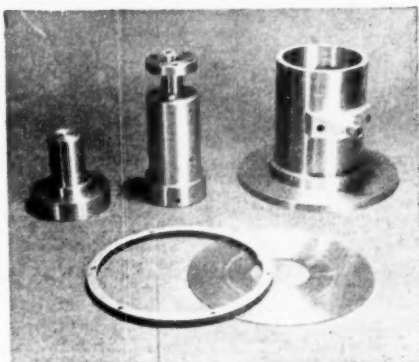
Disassembled View of Load Cell Showing Diaphragm, Flange, Tube, and Weigh bar.
